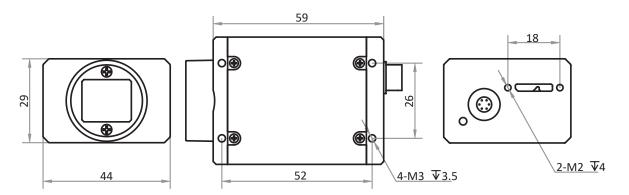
29 mm $\!\times$ 44 mm $\!\times$ 59 mm Mechanical Dimensions (in mm) of the USB3.0 camera.
